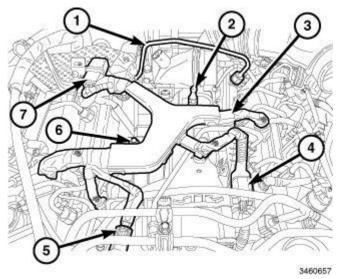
Wiring Harness Connectors & Fasteners Courtesy of CHRYSLER GROUP, LLC
